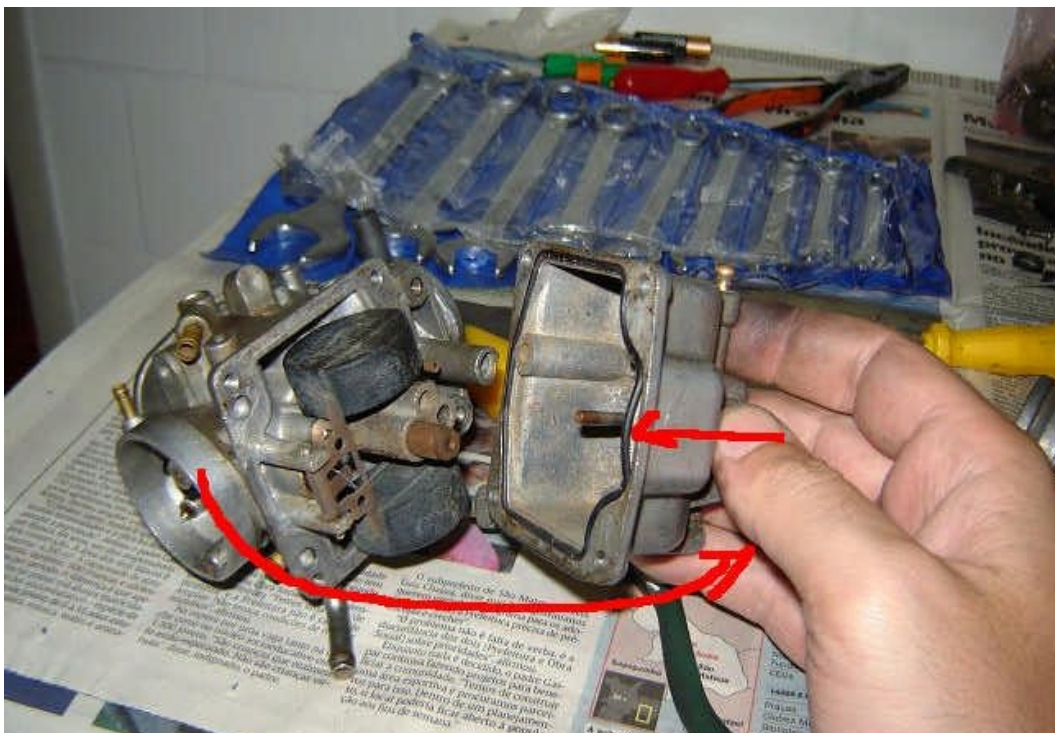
Remove the float bowl and try to avoid getting the rubber seal to wet with gas/petrol as it will swell the rubber & you will have difficulty refitting it.
